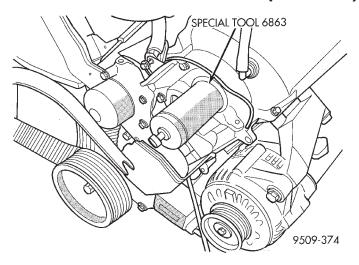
Camshaft Oil Seal Installation—Left Cylinder
